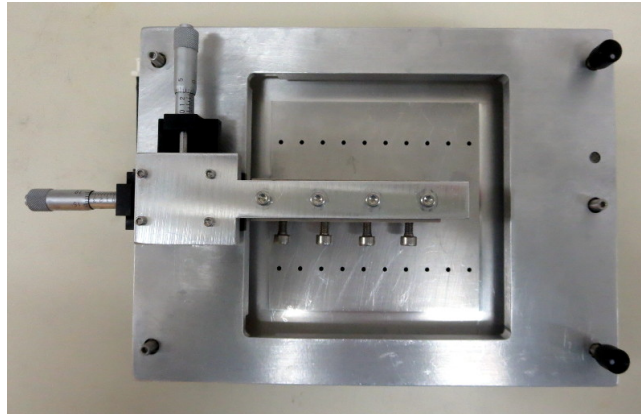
Full powerboard gluing tool assembly: while the module with hybrids is held in position using a vacuum jig, a powerboard with glue is positioned above it. The powerboard is held in a clamp, which is aligned with respect to hybrid and sensor edges using micrometer screws on the holding frame. Screws on the frame allow to set the glue height between powerboards and hybrid to the target height.
